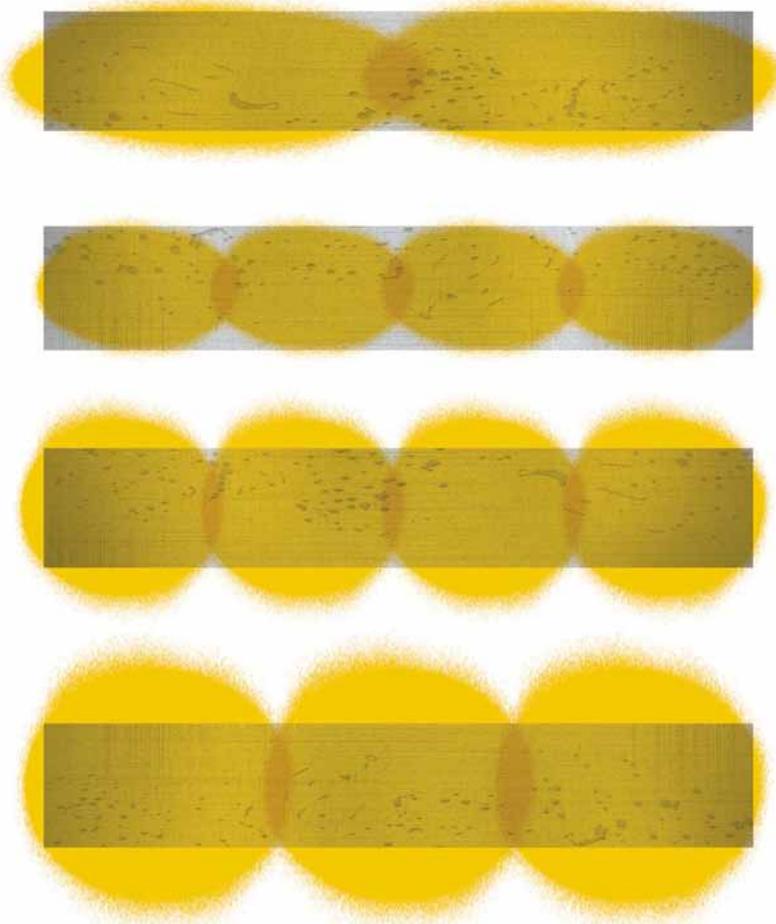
Correct lubricant spray patterns on tooth flanks.
